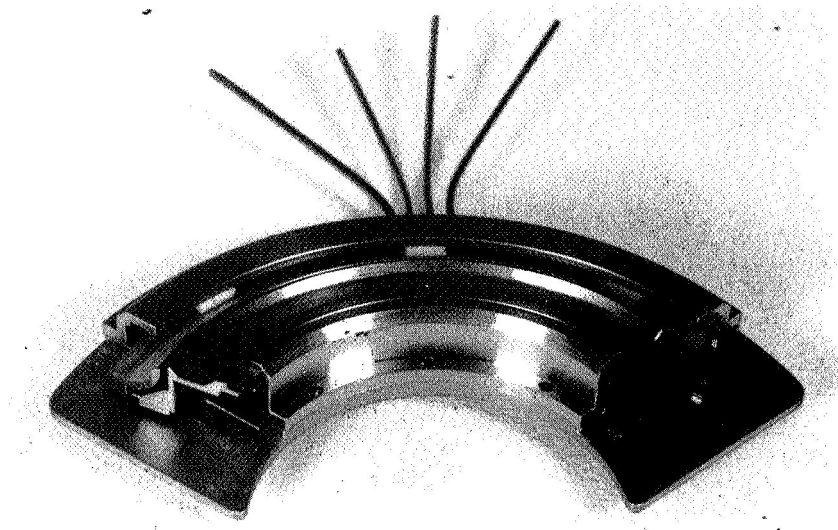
CLAMPED-UP GUN ASSEMBLY
